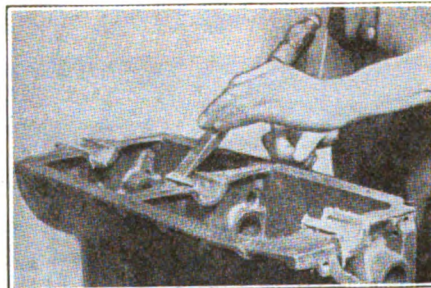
CUTTING OFF THE SURPLUS BABBITT
